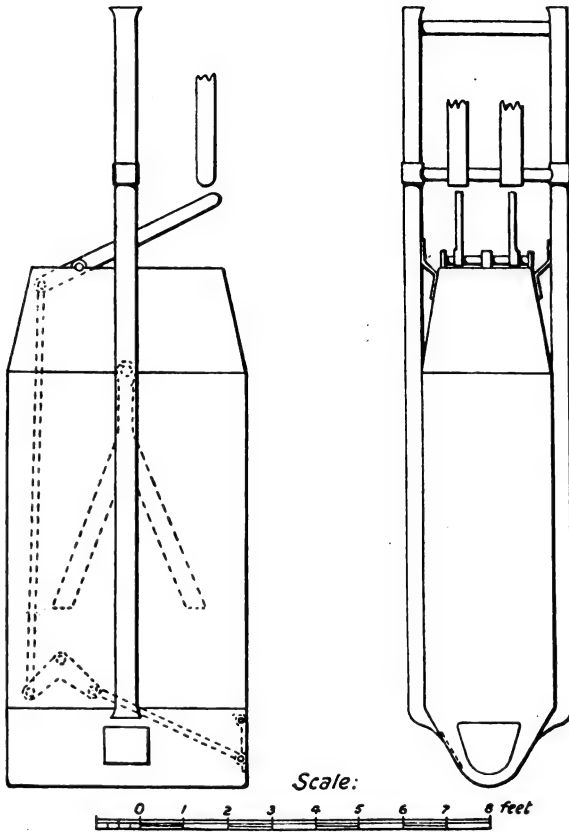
Type of "Bailing Tank" largely used in Sinking Shafts on the Rand.
